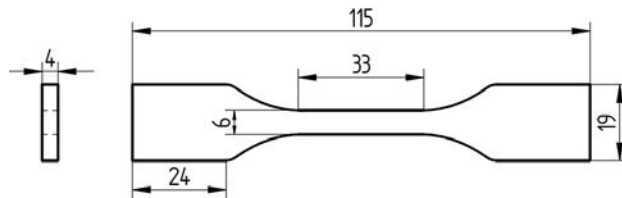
Dimensions of the tensile test sample type IV [34] fabricated by means of 3D printing
